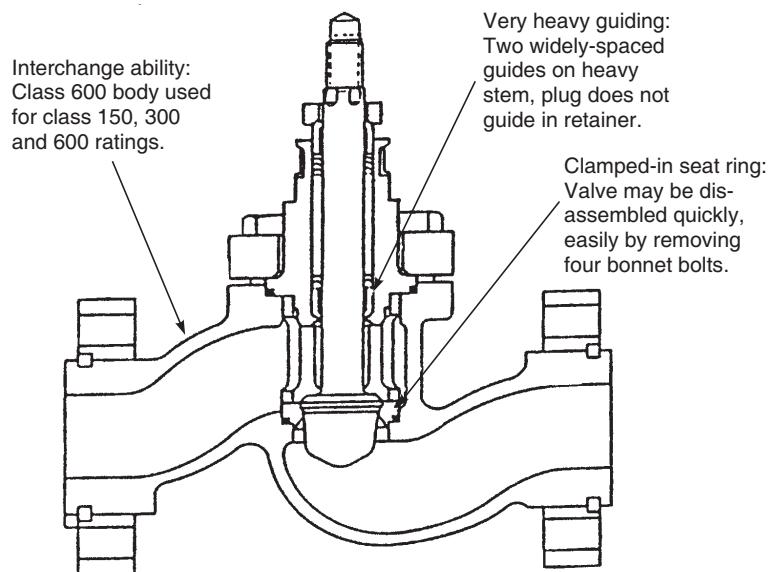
Top guided cage valve [Courtesy—Valtek Inc.].
